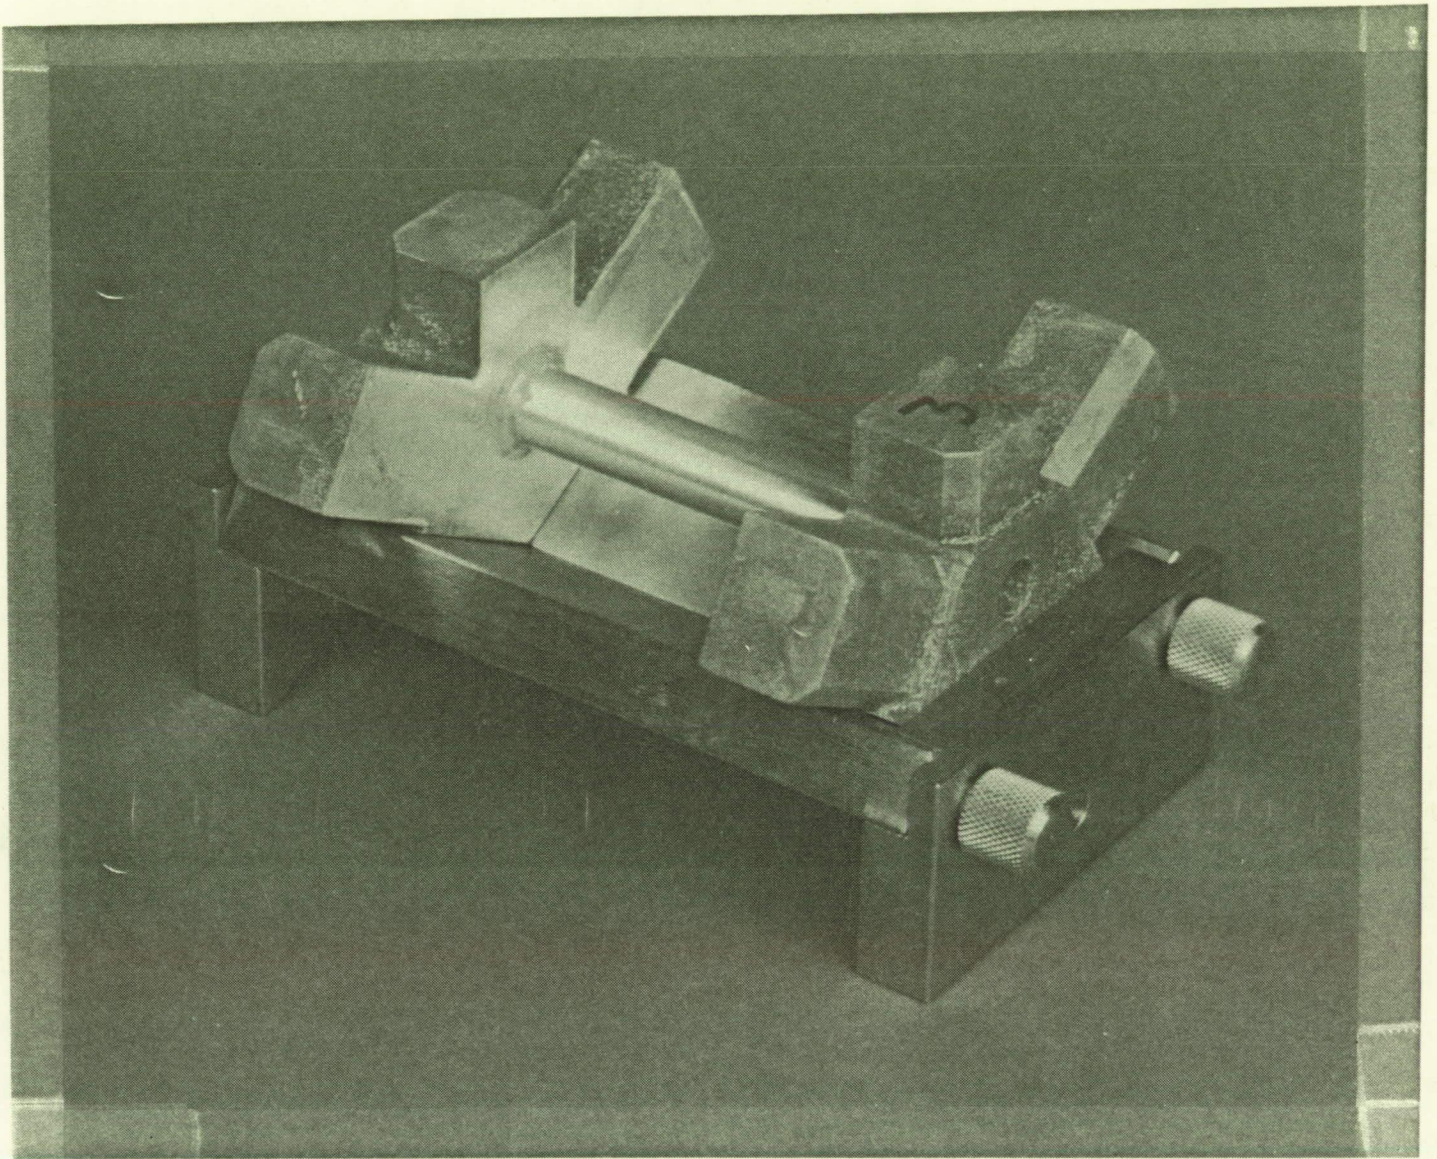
The Corner Fitting Bond Jig Holds The Top and Bottom Corner Fitting Interface Pieces Co-planar On The Top and Side Surfaces.
